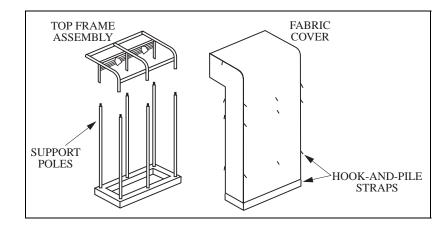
Disassembly of shower top frame, support poles, and fabric cover
